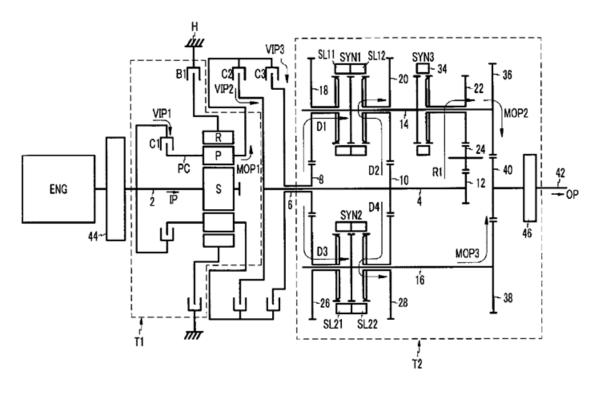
illustrates a combination of toothed gearing including non-orbital parallel shaft toothed gearing (T2) and orbital toothed gearing (T1). The orbital gearing includes two drive connections via (6) and (8) to the parallel shaft gearing.
